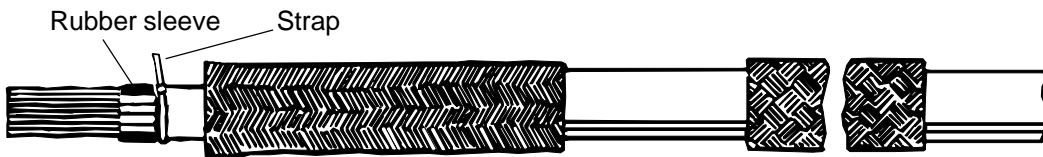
Positioning the tube on the wires and cutting the wires.
